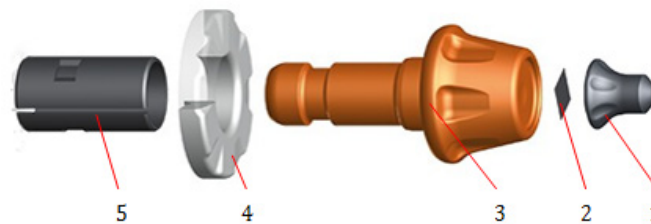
Components of a milling tooth: (1) tungsten carbide tip; (2) brazing tablet; (3) body; (4) wear plate; (5) clamping shank.
